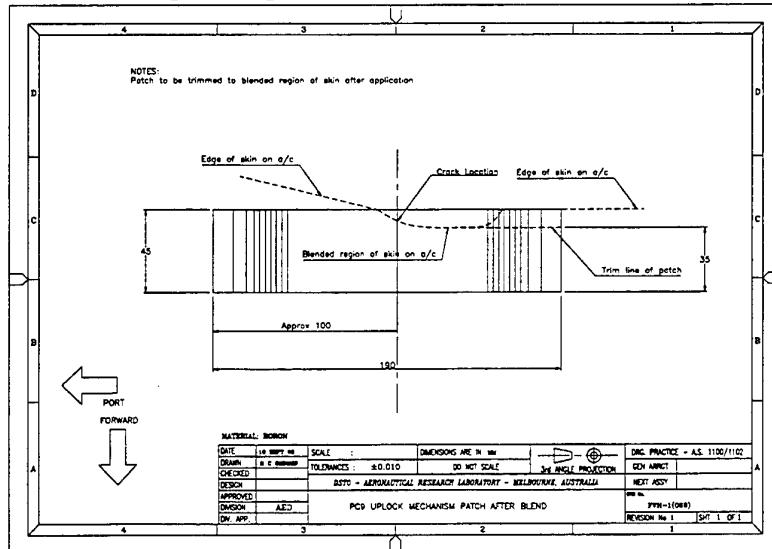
Drawing of the port uplock mechanism patch applied at 38,000 SFH.
